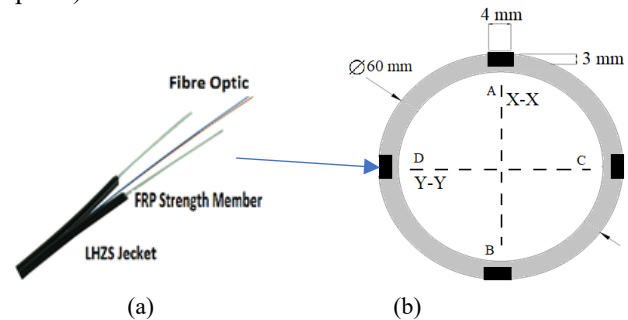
Attachment of optical fibre sensors along the machined grooved PVC casing
